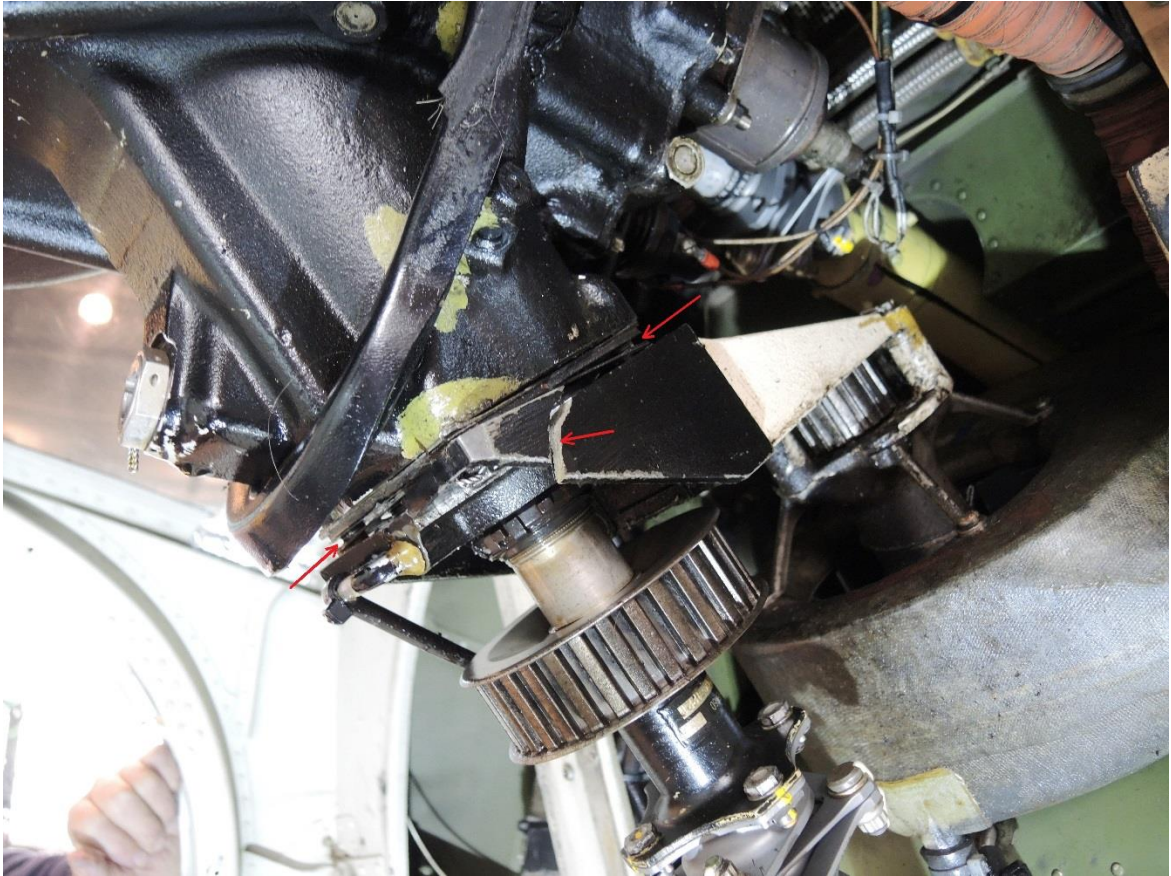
The main gearbox section where the shaft from the engine enters the main gearbox. The cooling fan drive belt has fallen off. The red arrows show a fracture and gaps. Photo: NSIA
